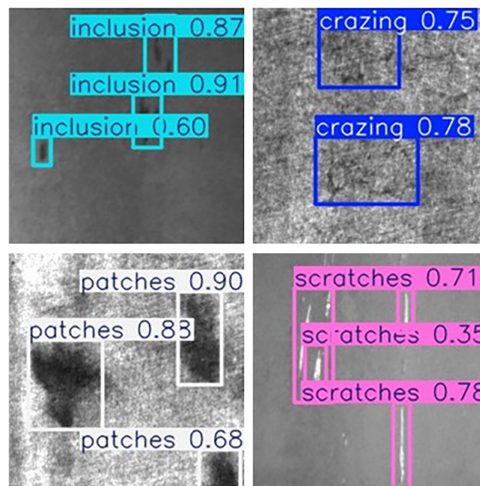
Representative photographs of typical surface defects in steel plates.
